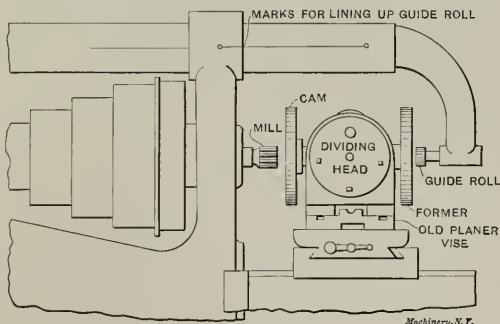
Inexpensive Fixture for Milling Plate Cams to Match a Former.
